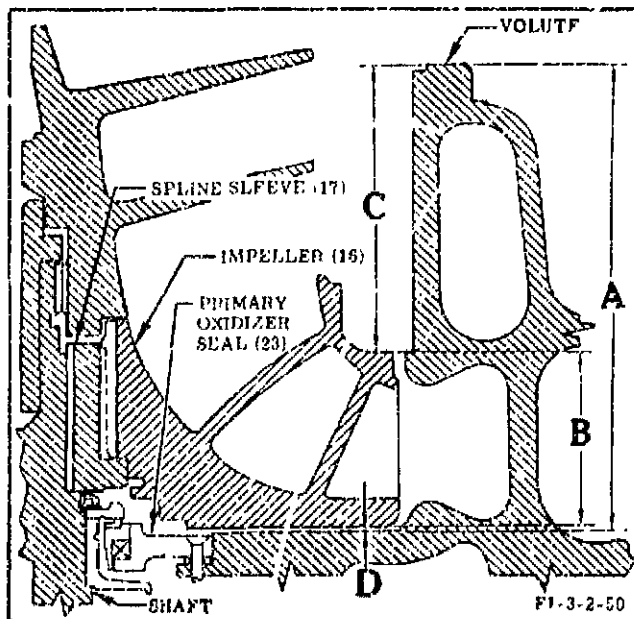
Rechecking Oxidizer Impeller Rib Clearance
